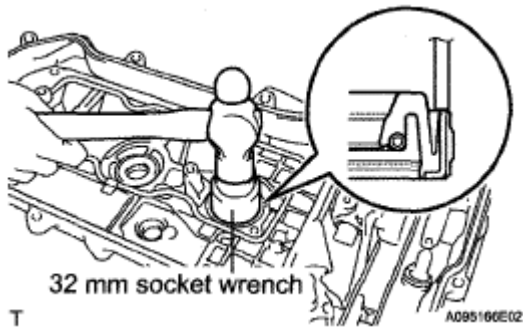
Tapping Spark Plug Tube Gaskets To Head Covers
